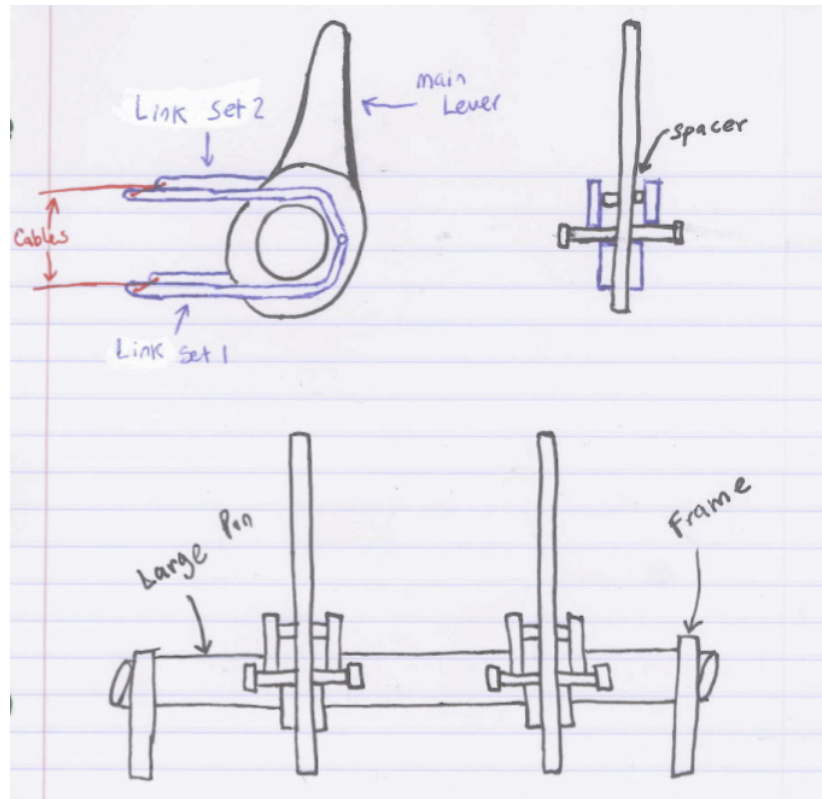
Hand-controlled, lever actuated cable system. This design uses a lever to control a set of links that actuate a set of cables.
